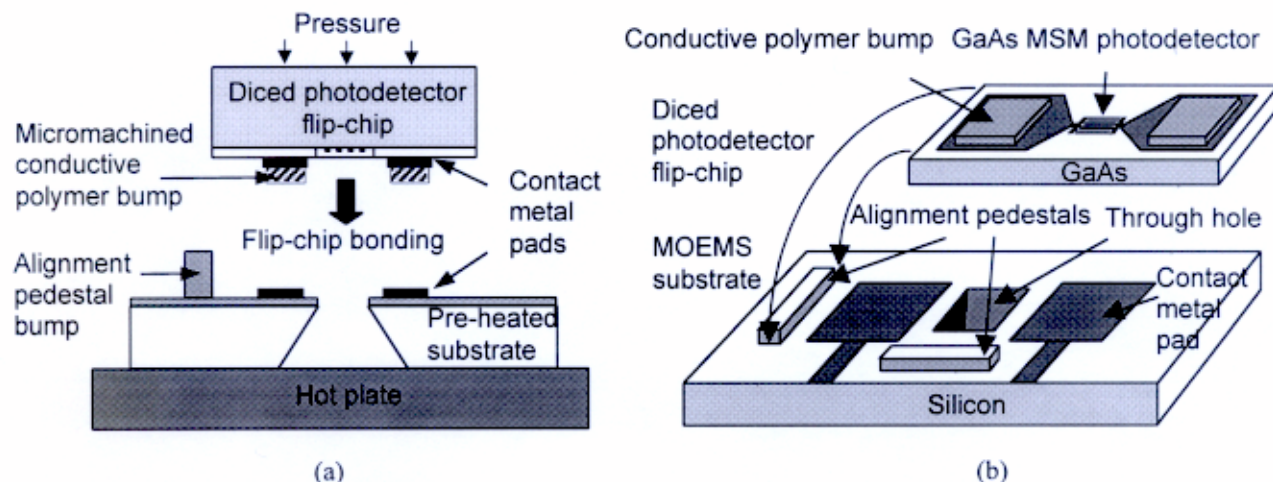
Illustration of the flip-chip bonding technique for a prototype MOEMS structure: (a) cut view for wafer bonding and passive alignment and (b) schematic view.
